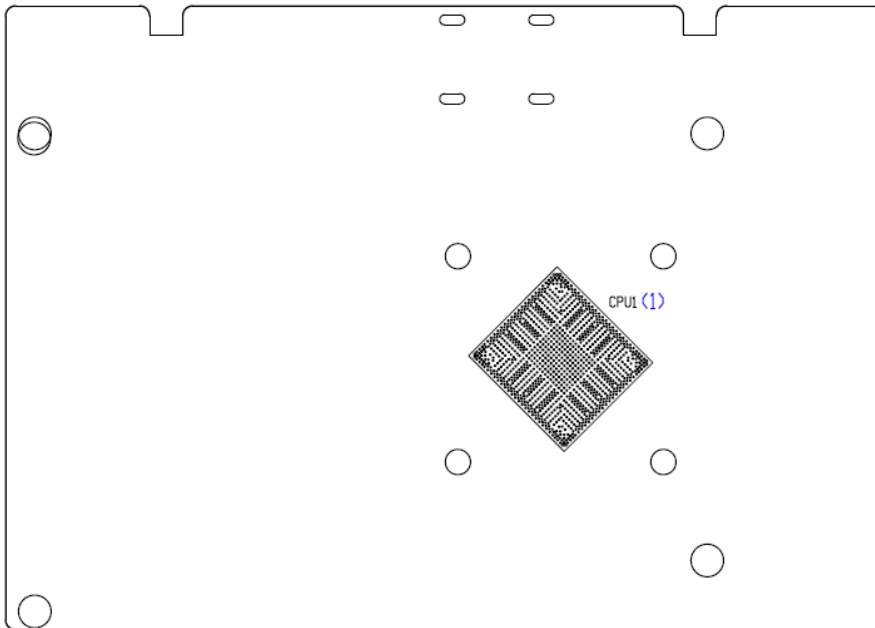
Jumpers and Connectors Location- Board Bottom
